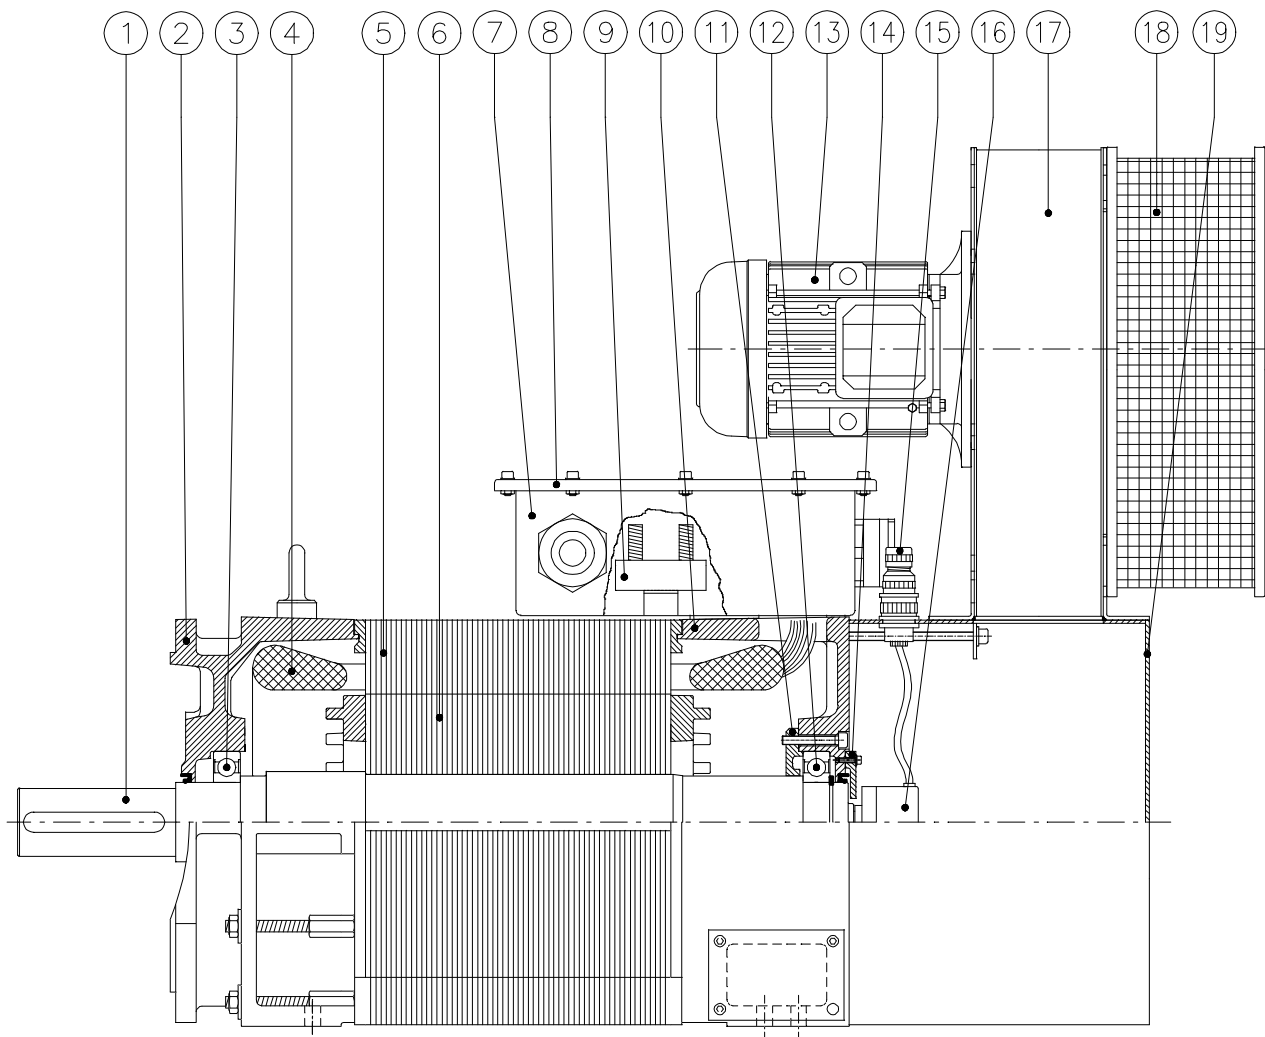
BQCp132-160-180 motors layout diagram
